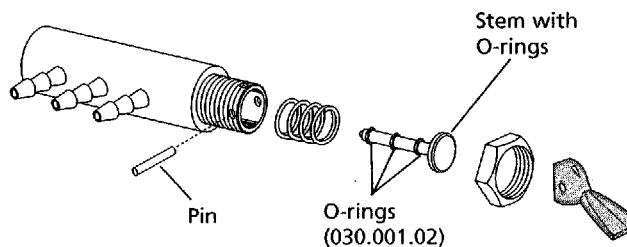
Selector valve assembly (A-dec part no. 33.0104.01)
